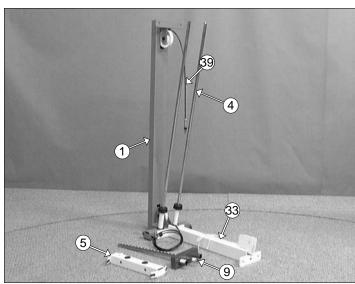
Remove the Guide Rod Retainer (#5), and the Top Plate Selector Bar (#9) to allow the assembly of the weight plates.
